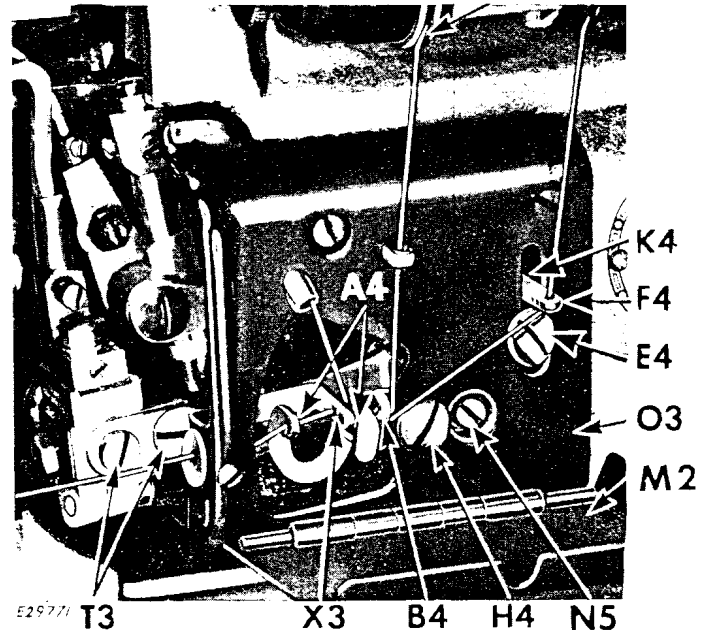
Adjustments on Take-up for Two-thread Stitch and Three-thread Tight Needle Thread Stitch
